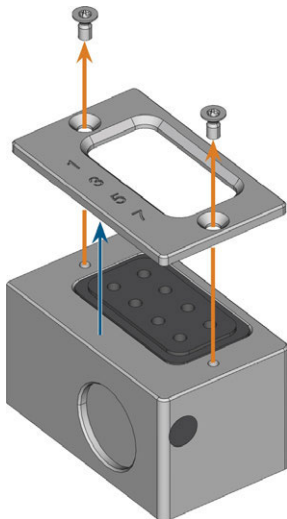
REMOVING THE COVER OF THE TOOL MAGAZINE
